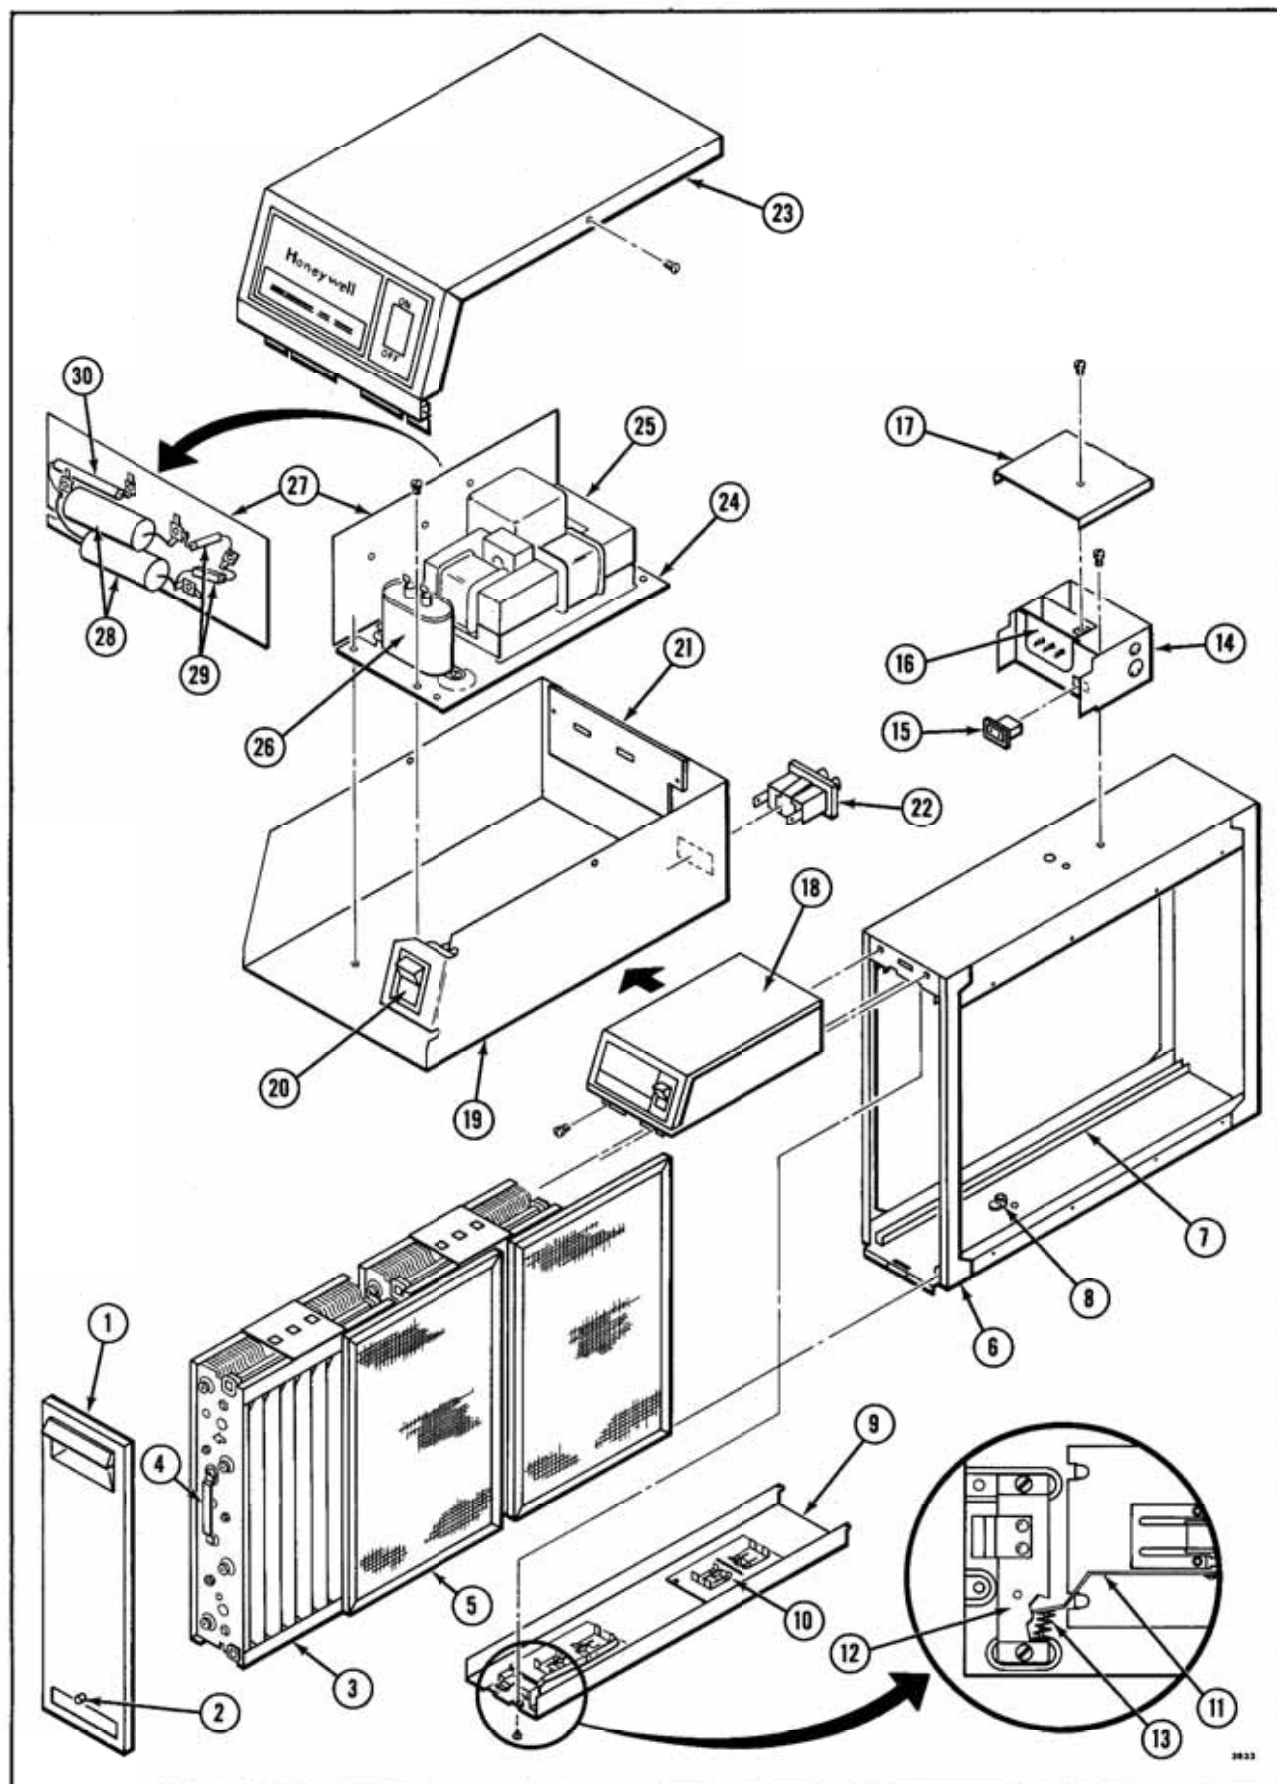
COMPONENT PARTS OF THE F50A ELECTRONIC AIR CLEANER.
